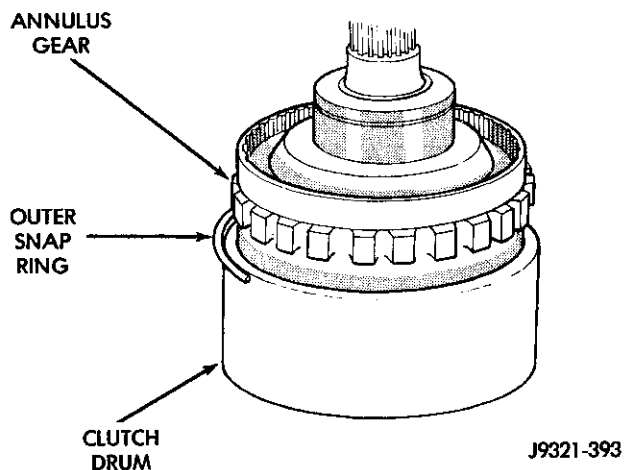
Clutch Drum And Outer Retaining Ring Installation
